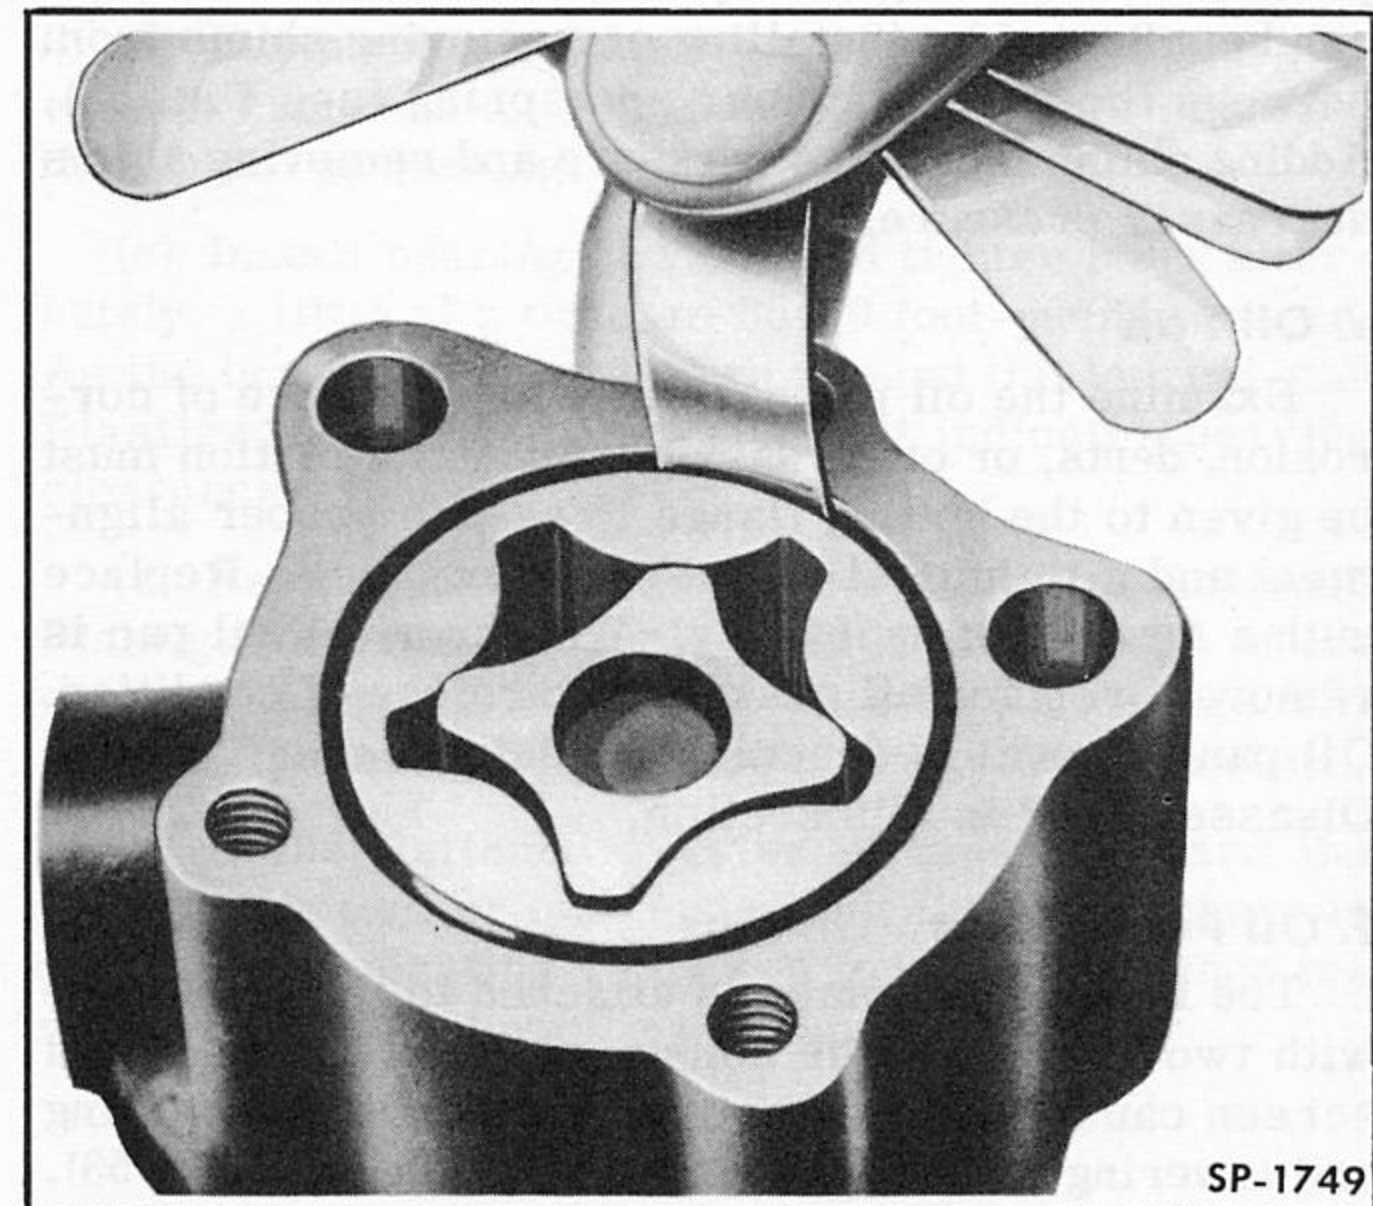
Checking Clearance Between Outer Rotor and Pump Body
